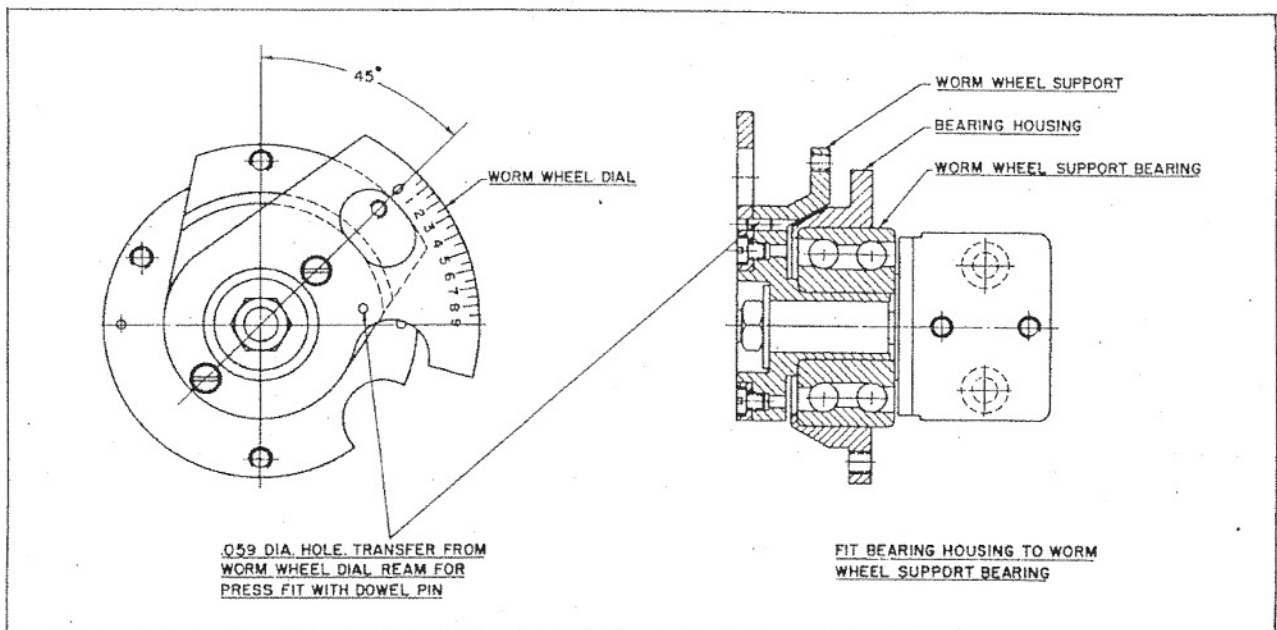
Sectional View - Worm Wheel Support Assembly Aircraft Sextant - Type A-7 (3003-A, 3003-B)
